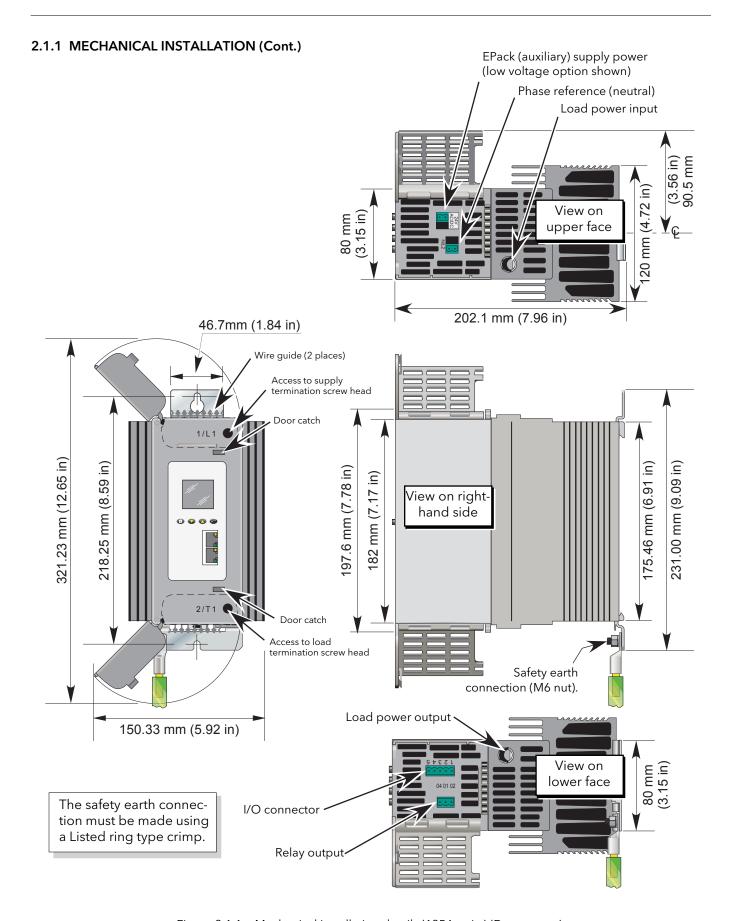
Mechanical installation details (125A units) (Doors open).
